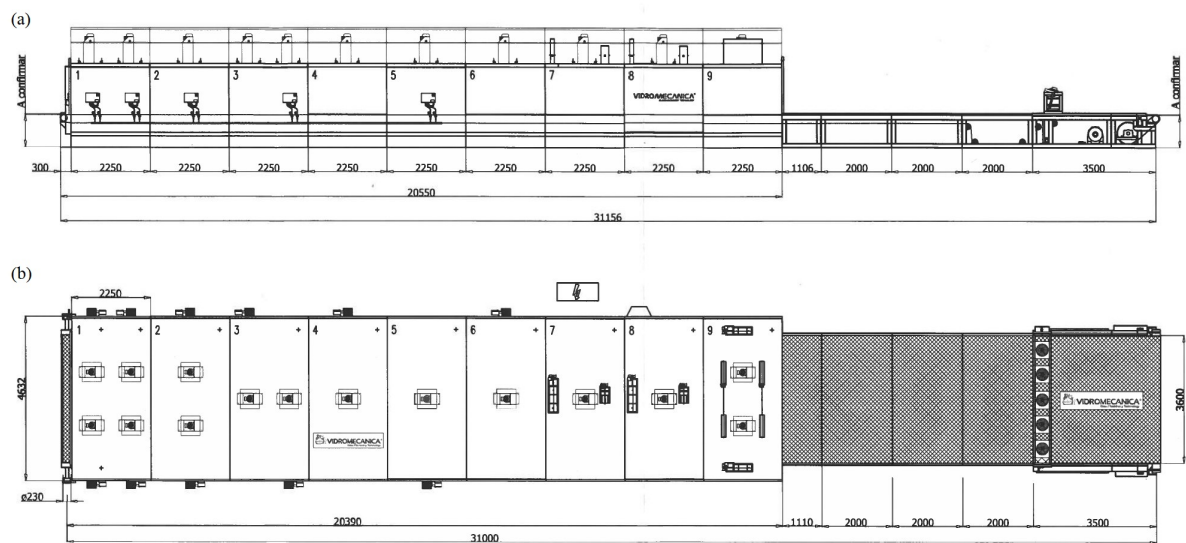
Drawing of annealing lehr adapted from Vidromecânica (2019), in which (a) is the side view and (b) is the top view of the machine.
